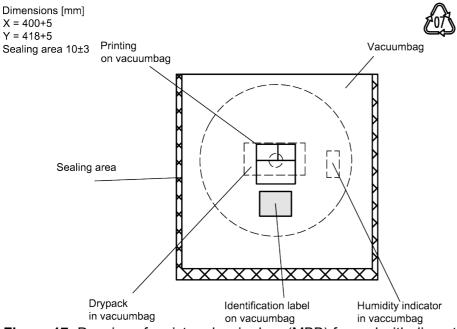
Drawing of moisture barrier bag (MBB) for reel with diameter of 330 mm.
